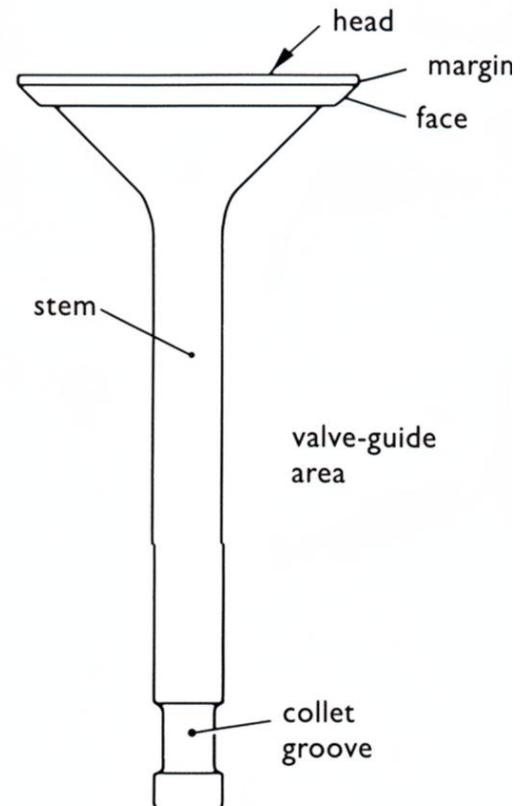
Schematic representation of an exhaust valve showing its main components, including the head, margin, face, stem, valve-guide area, and collet groove.
